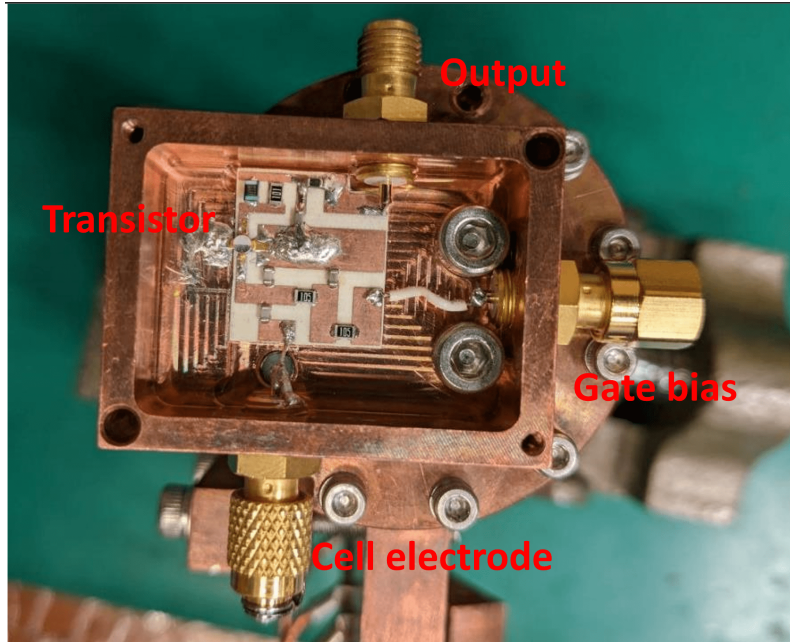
Circuit board in the housing. Case made of pure copper, with a wall thickness of 3 mm. The source lead of the transistor is soldered using a low temperature indium based solder onto the copper housing
